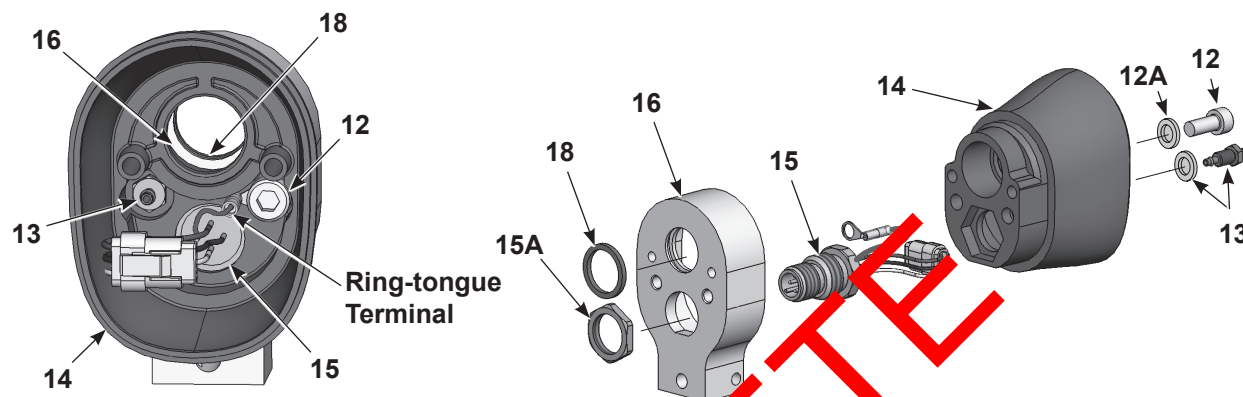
Bar-Mount Gun Disassembly 3 of 3
